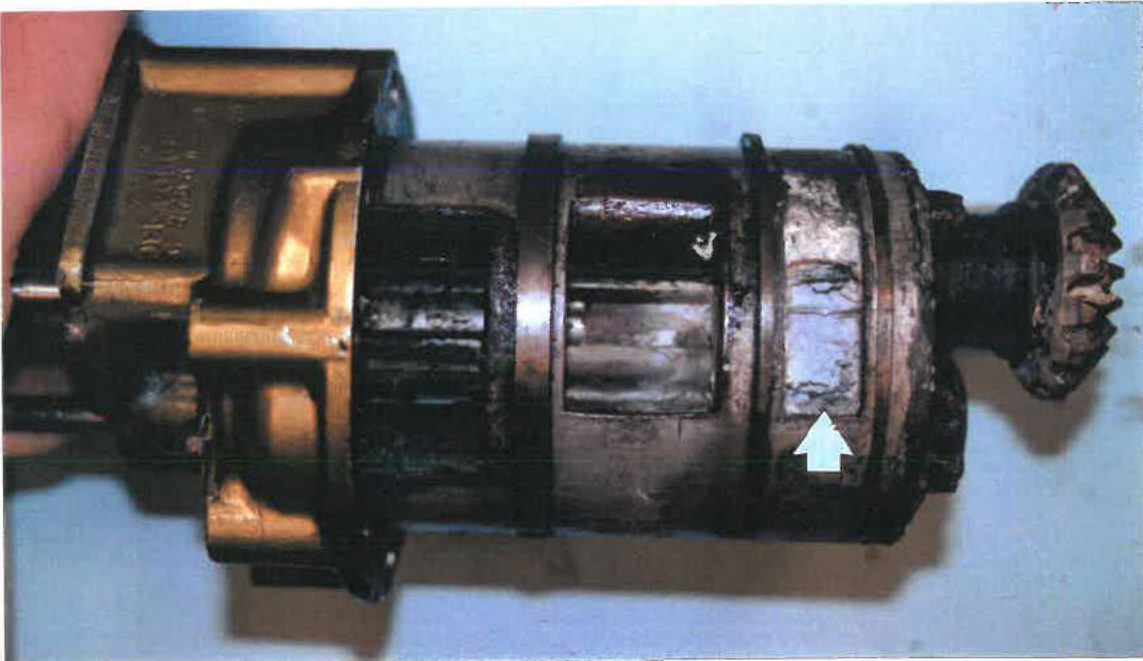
The oil pump showing the amount of corrosion products present on the front end plate side section.
